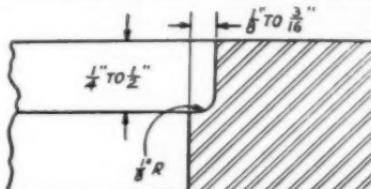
Enlarged section showing method of grooving dies prior to hard-facing.
